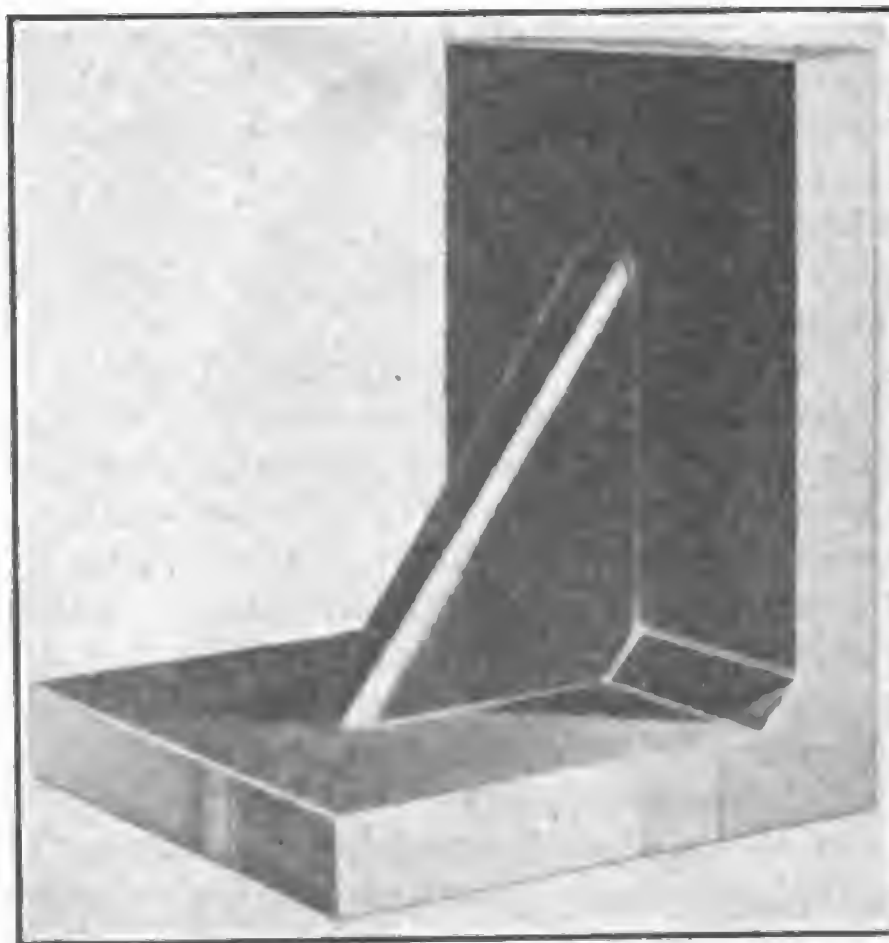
Angle Irons Are Found Useful for Handling Odd Shaped Work.
